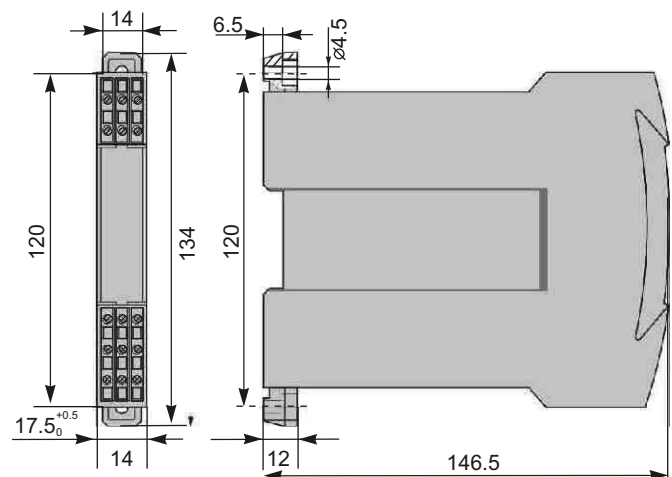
RISH Ducer TI 807-1.... (housing S17) screw hole mounting. brackets pulled out.
